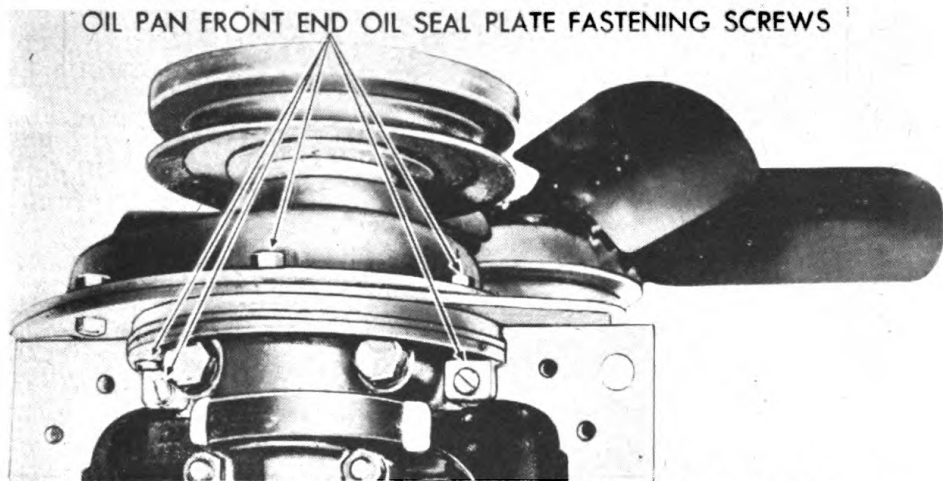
Oil Pan Front End Oil Seal Plate Fastening Screws
